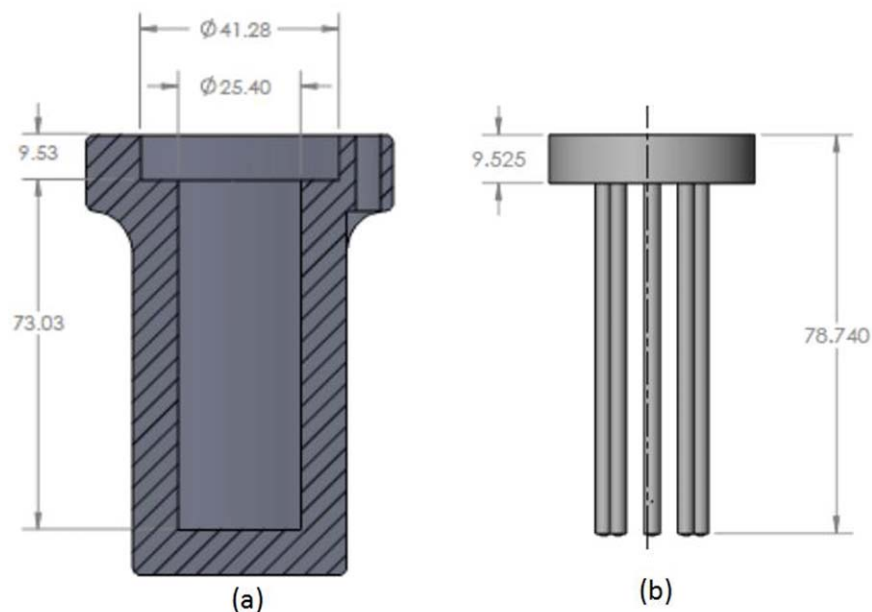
Reaction chamber of the JBR: (a) ceramic crucible and (b) heating element assembly (dimensions are in mm).
